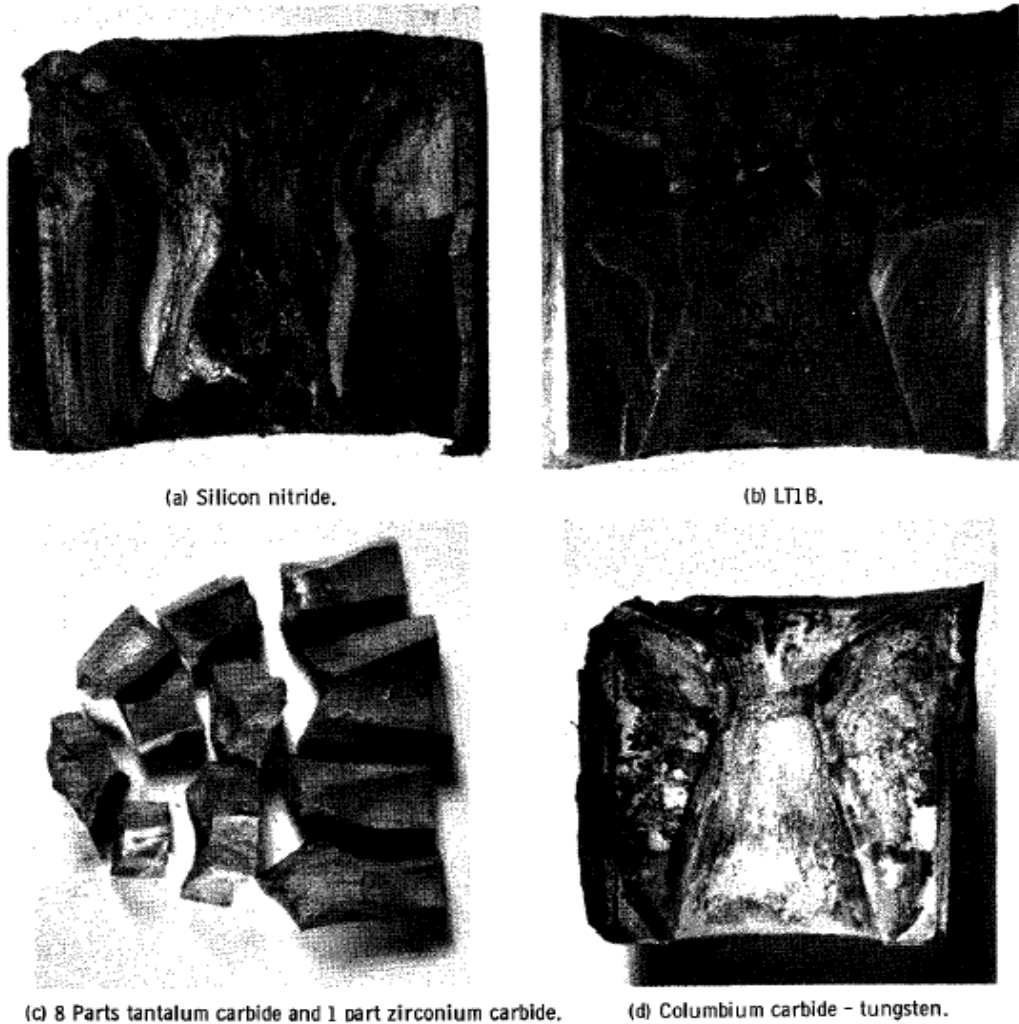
Thermal-stress failure in nozzle inserts. (Reduced 40 percent in printing.)
